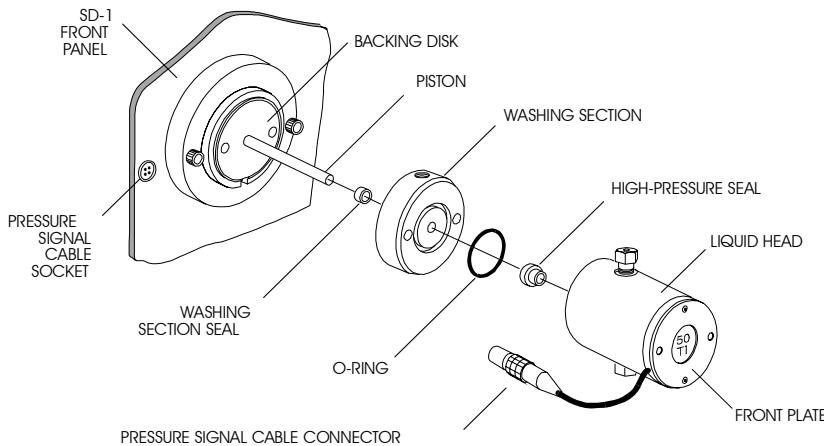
Liquid Head Exploded View (50 mL/min head shown)
